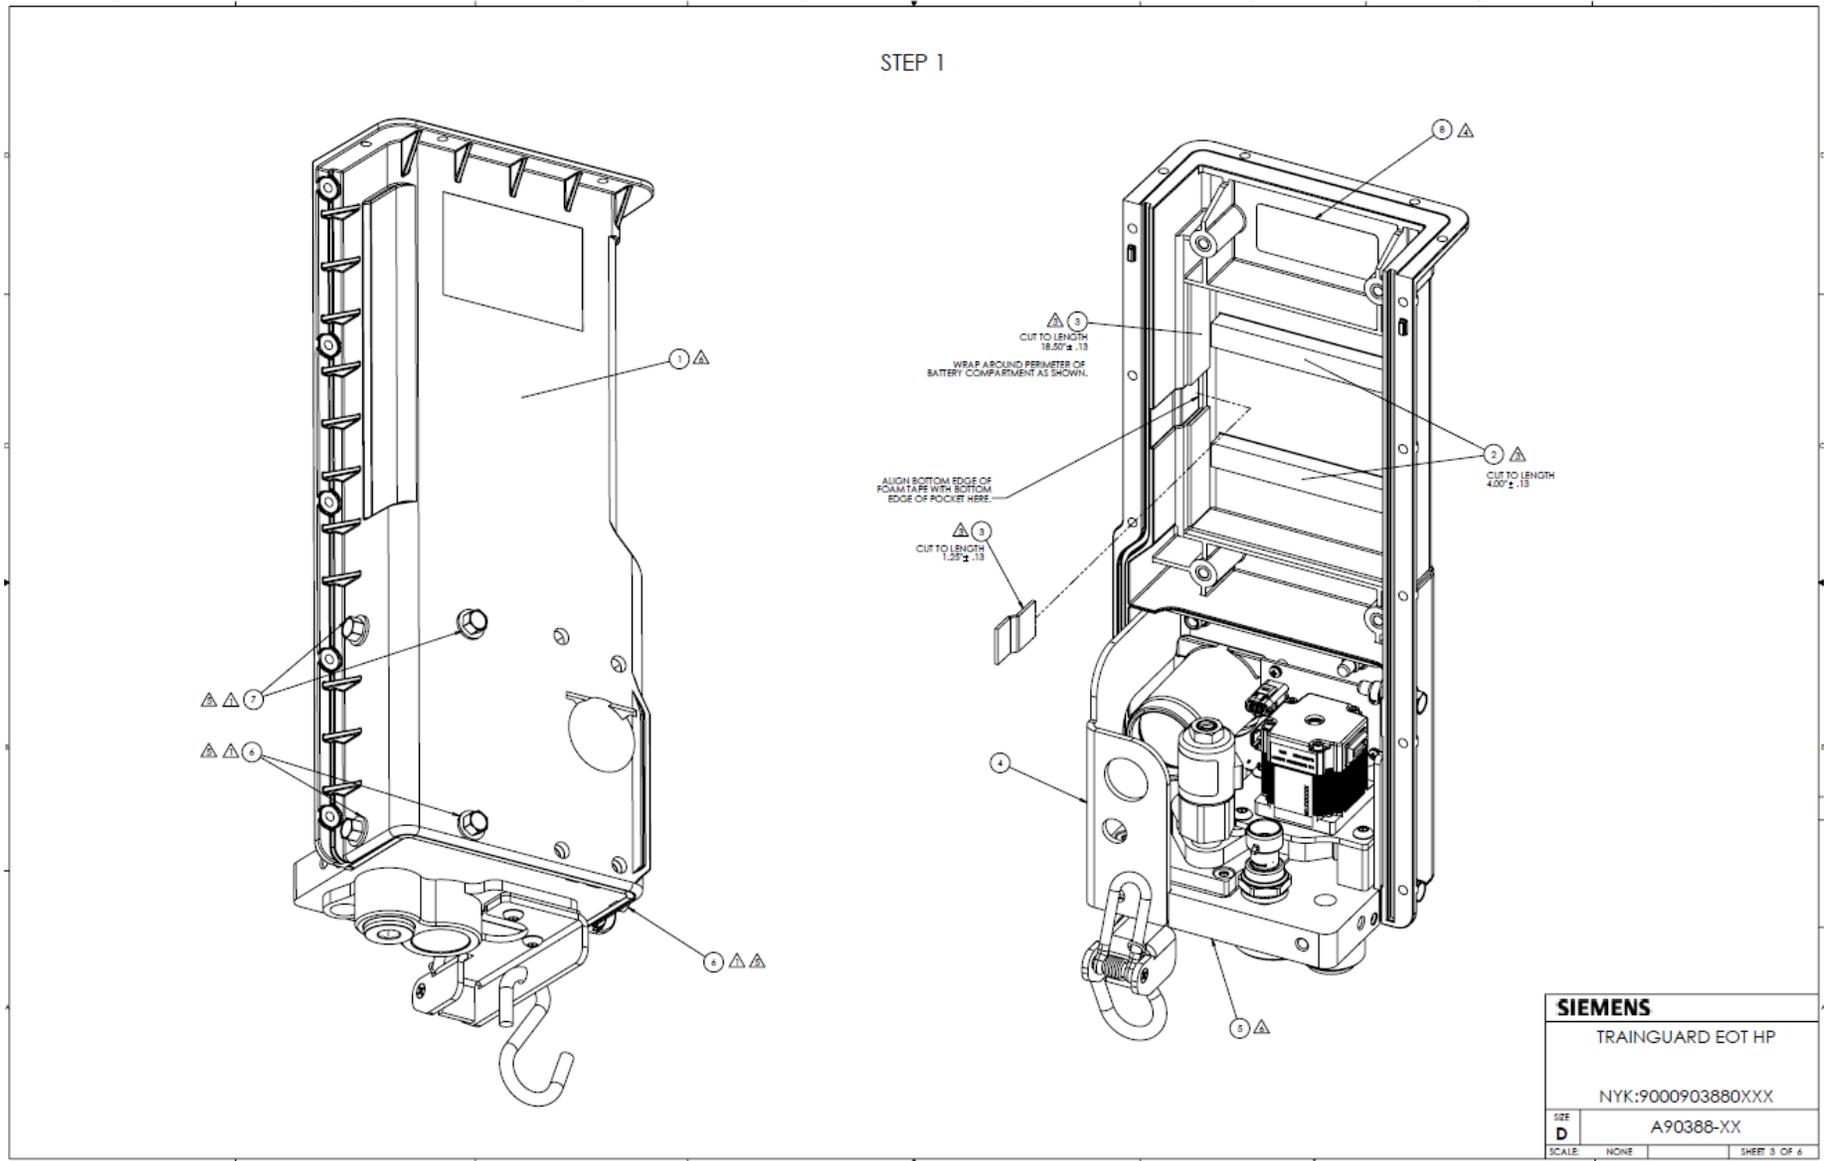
Main Assembly with HP Manifold, A90388 Sheet 3
